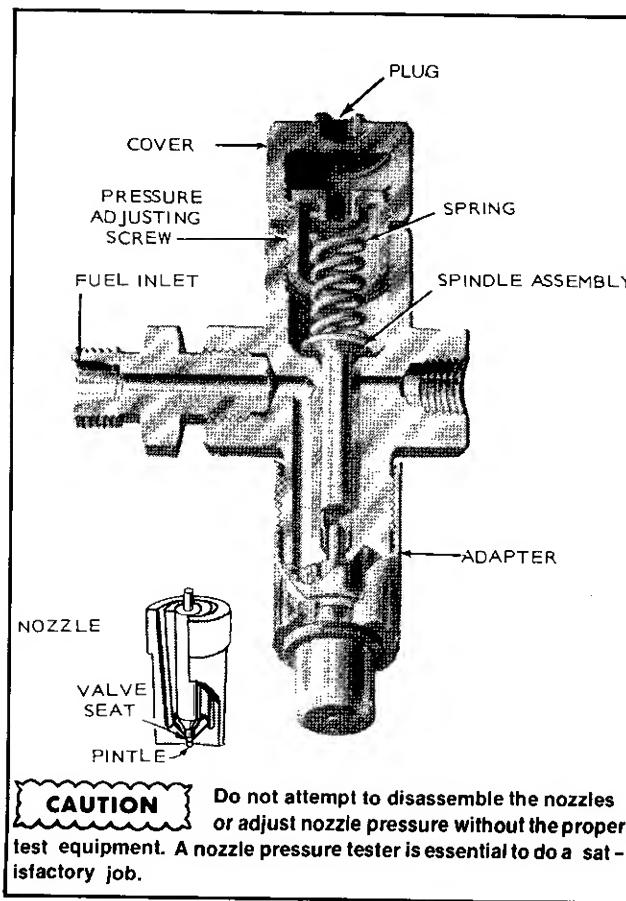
INJECTOR NOZZLE HOLDER
